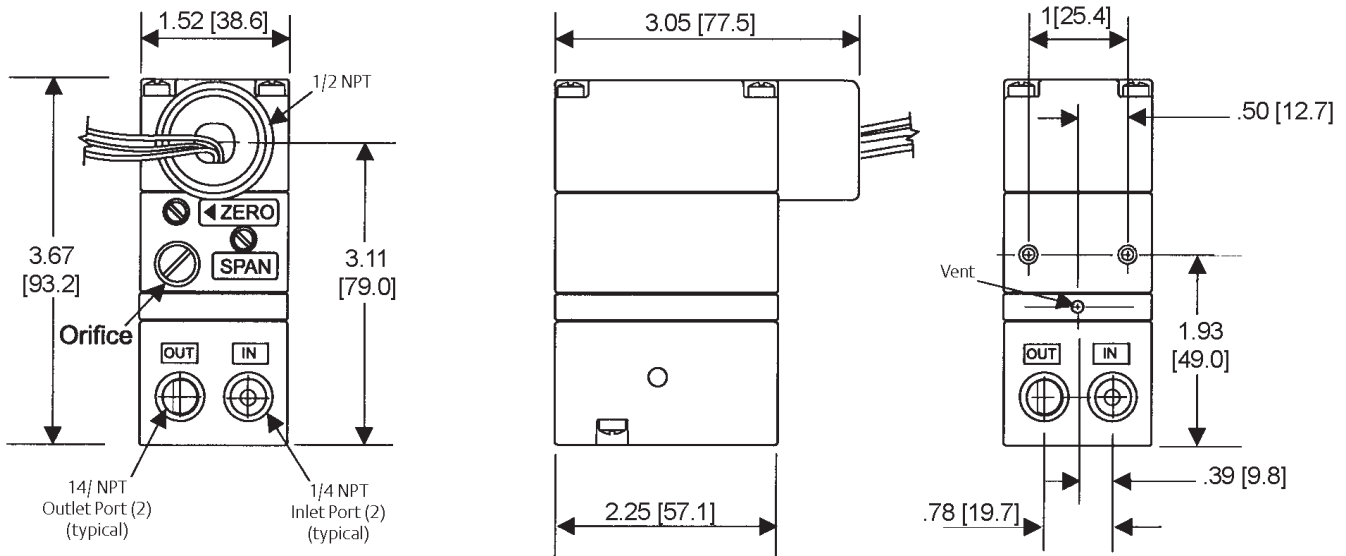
TA6000 Electropneumatic Transducer Dimensions, inches [millimeters]
